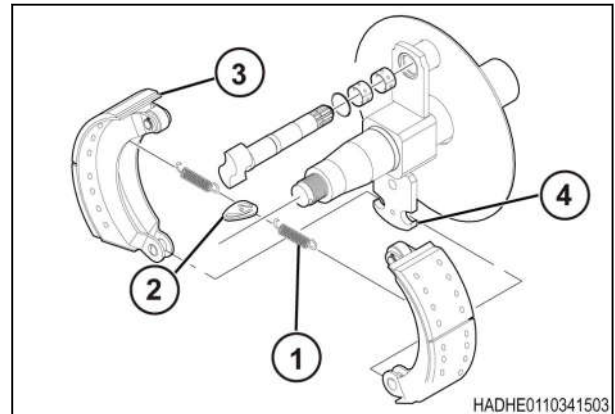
Tandem axle machines made before serial number AGCxxxxxxJHBxx101
